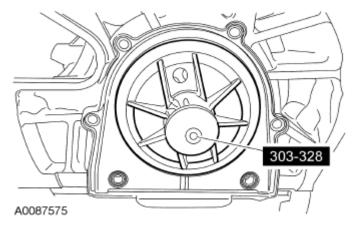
Identifying Crankshaft Rear Main Oil Seal Installer Courtesy of FORD MOTOR CO.
